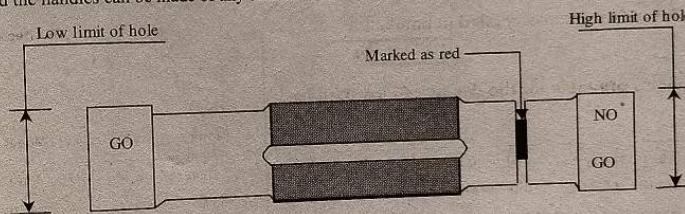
Solid Type Plain Plug Gauge (upto 10mm)
